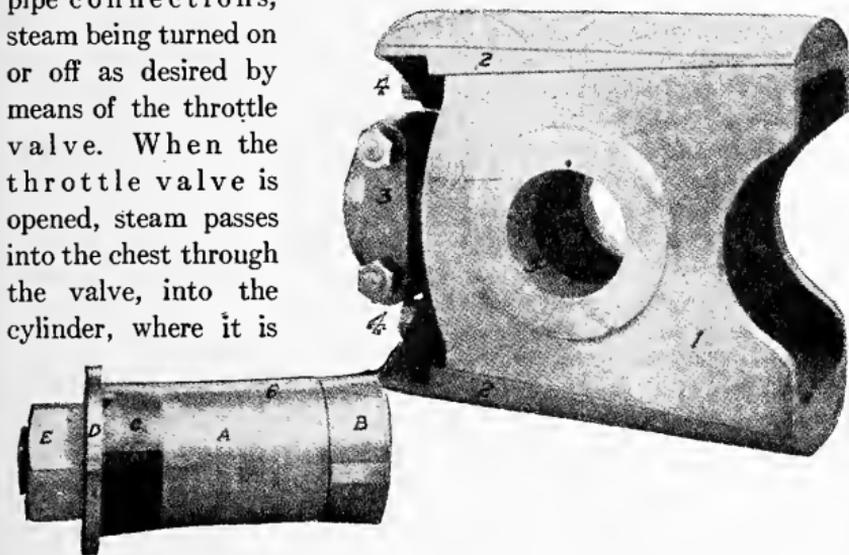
Typical Crosshead and Pin for Large Size Engine
